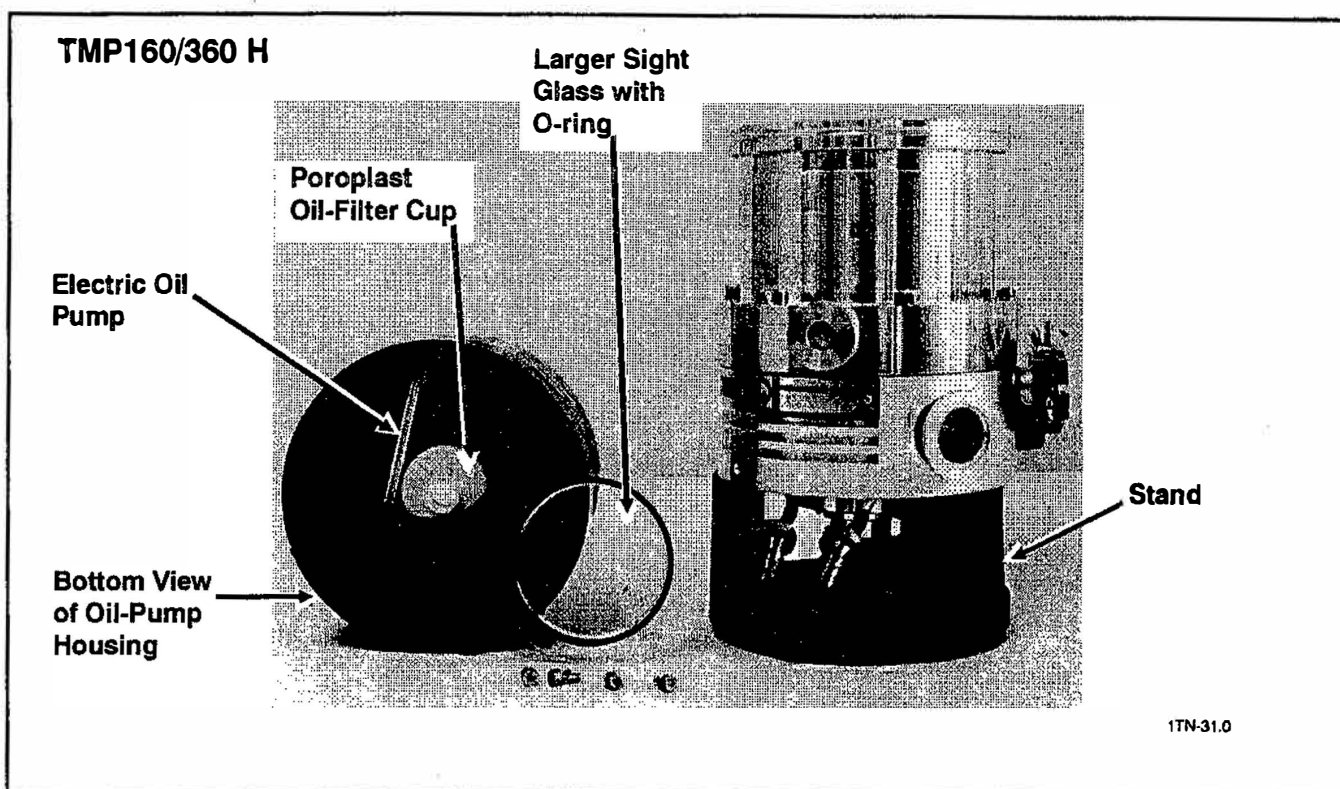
TMP150 H with Oil-Pump Housing Removed
